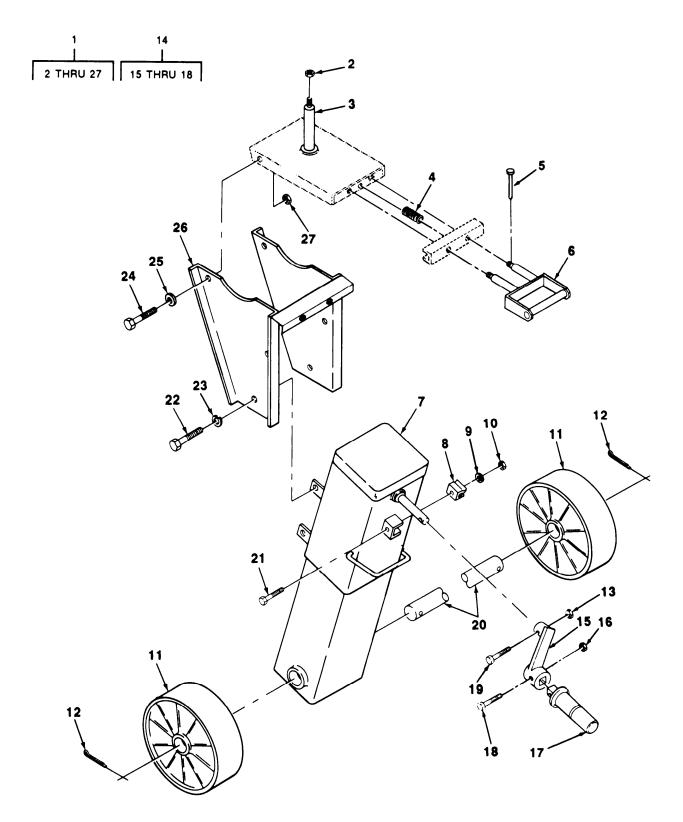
ADJUSTABLE CASTER ASSEMBLY.
